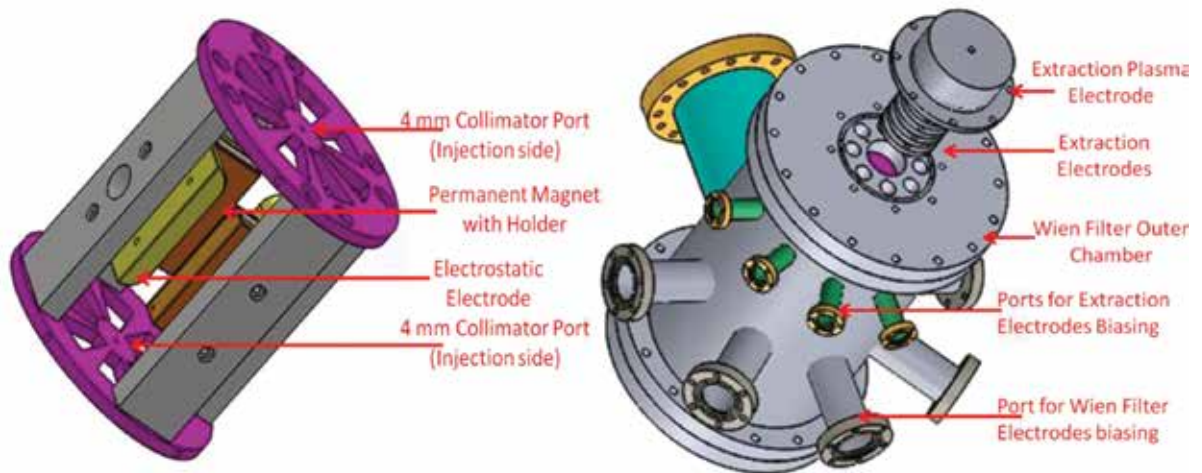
Mechanical design of the compact Wien Filter: (Left) Inside assembly of Wien Filter and (Right) Outer jacket of Wien filter coupled with pumping system and the extraction system.
